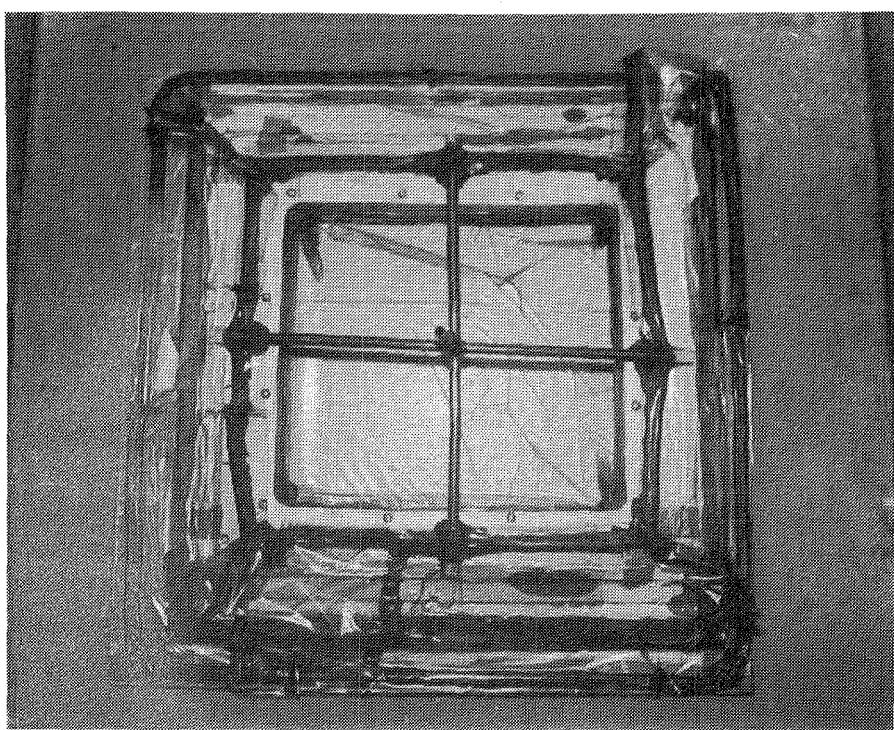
"Total Wheelchair" Seat Mold and Vacuum Bag Assembly
